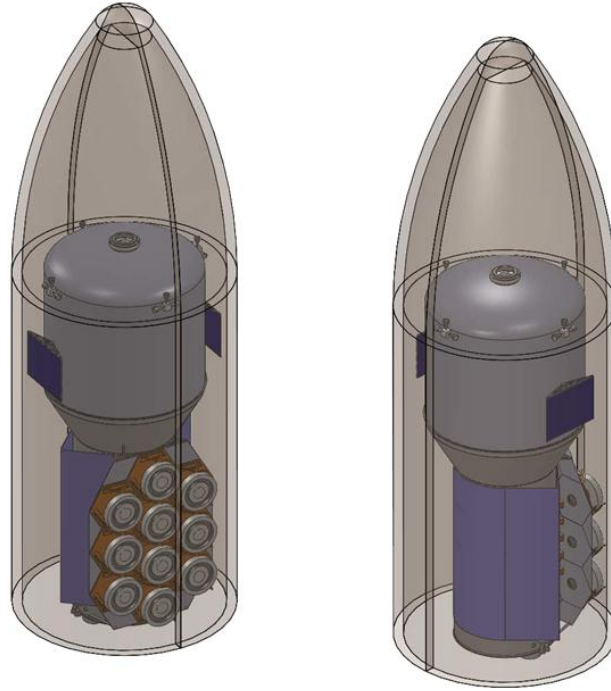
Isometric views of the Hab/EP element stowed within the SLS Payload Shroud.
